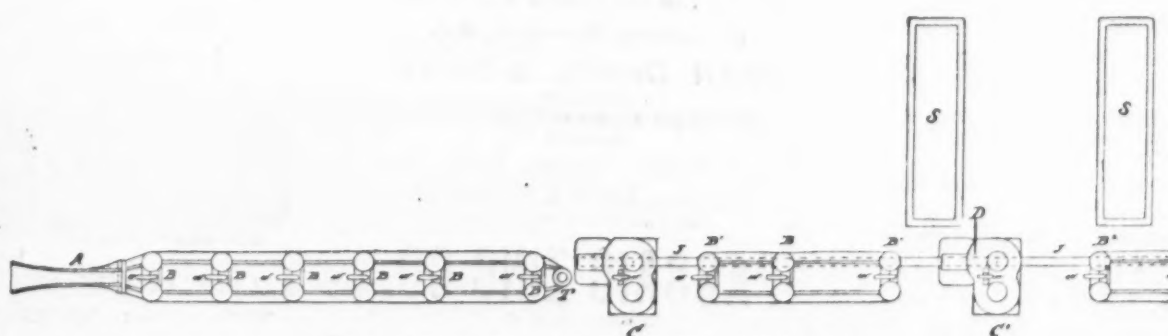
General Plan of Switch and Adjacent Grip Rolls.
